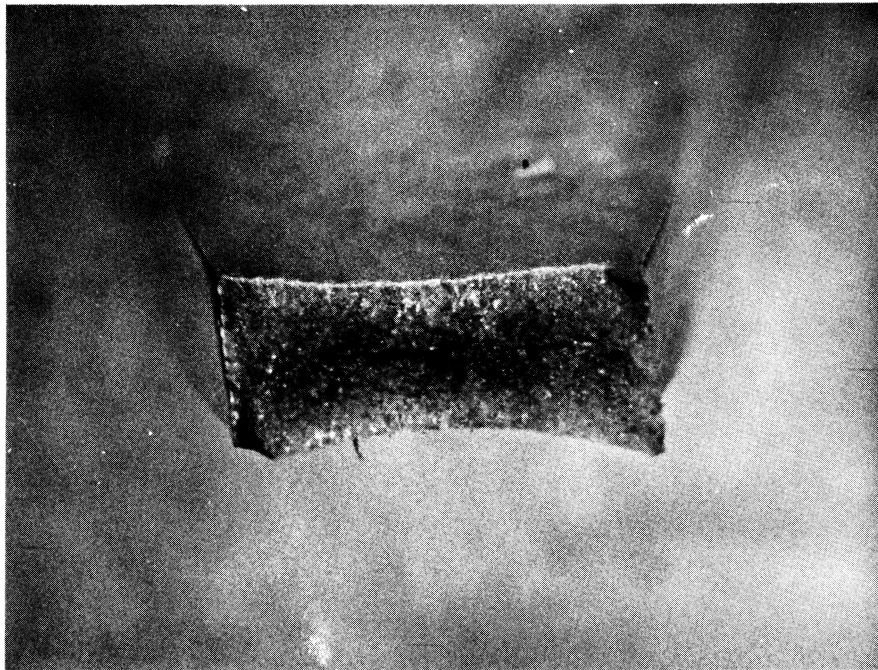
Fracture surface of martensite baseline fatigue specimen 3-19 (1,790 cycles).
